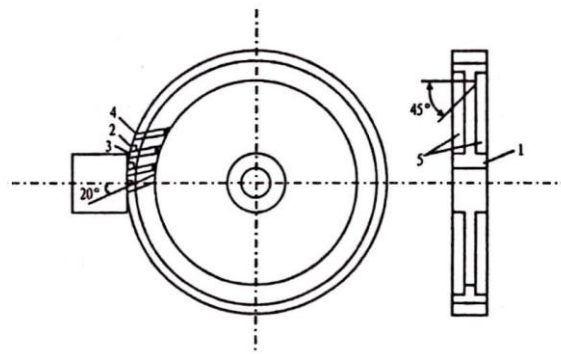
Two-dimensional diagram of a milling cutter for machining aluminium [12]
